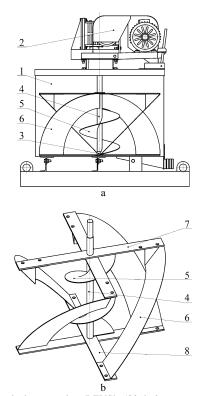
The planetary mixer BP-750 design: a - overall view; b - physical form; 1 - mixer hopper; 2 - drive rack; 3 - mixing star with beaters; 4 - engine; 5 - gearbox; 6 - movable axle
